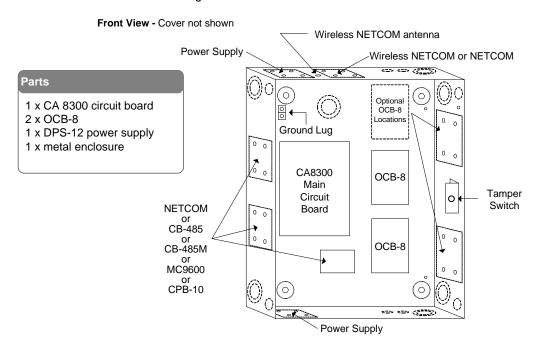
EC 1000 with Circuit Board Mounting Positions
